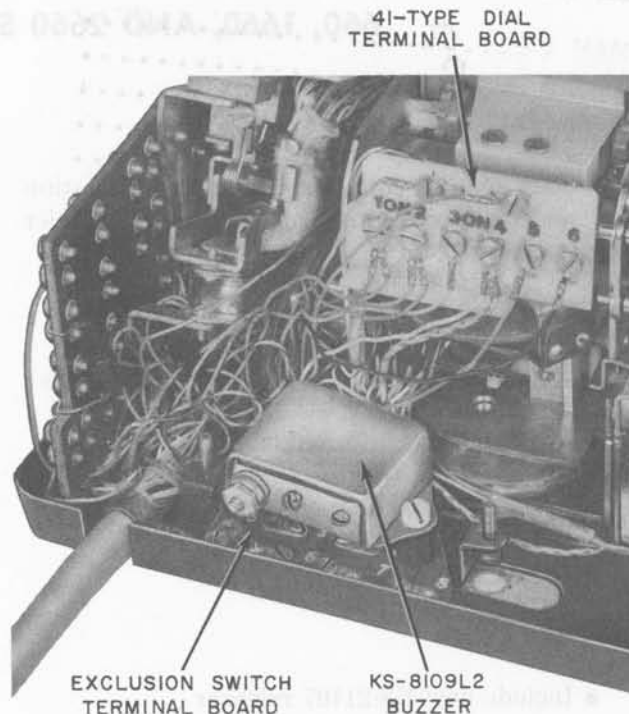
Location of Buzzer and Terminal Boards in 660- and 662-Type Telephone Sets
